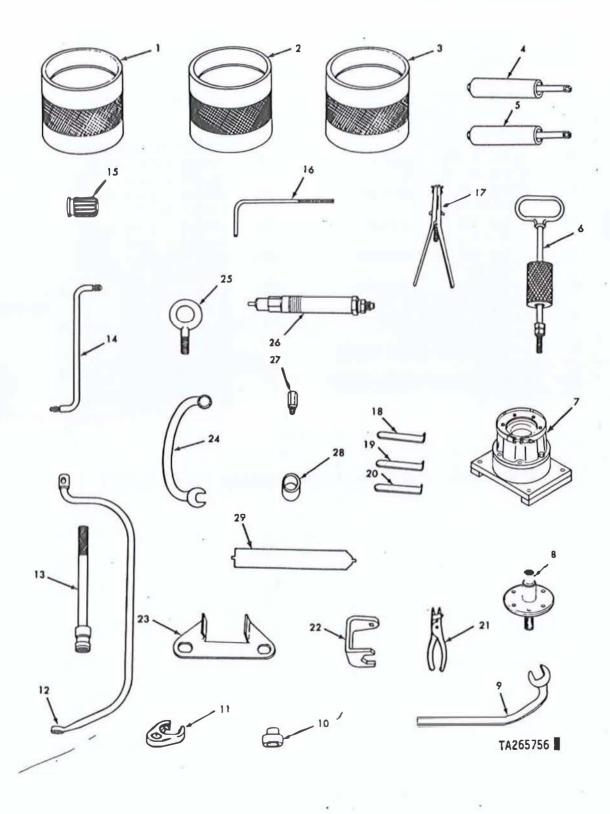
Special tools and equipment (sheet 1 of 2).
